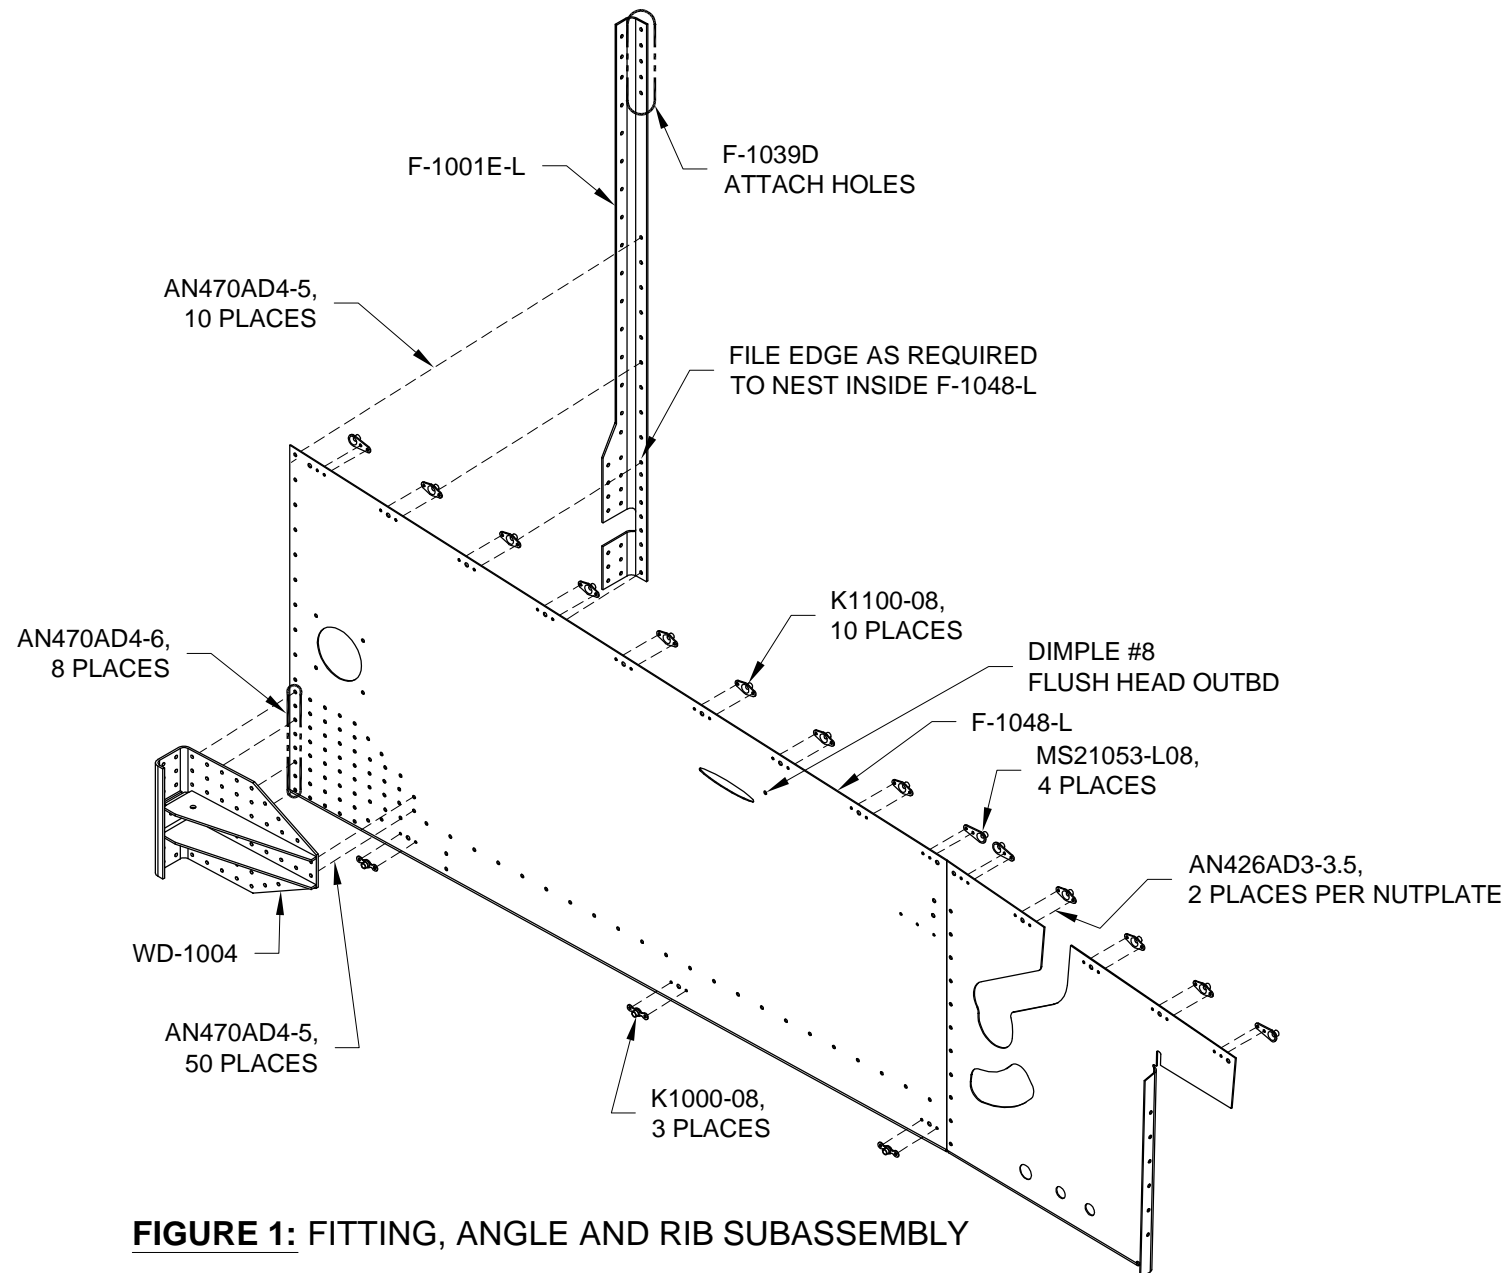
FITTING, ANGLE AND RIB SUBASSEMBLY
